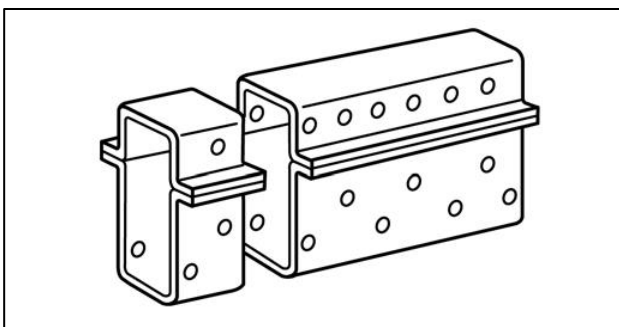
“Straight” frame cut, taking example of frame longitudinal member on chassis
